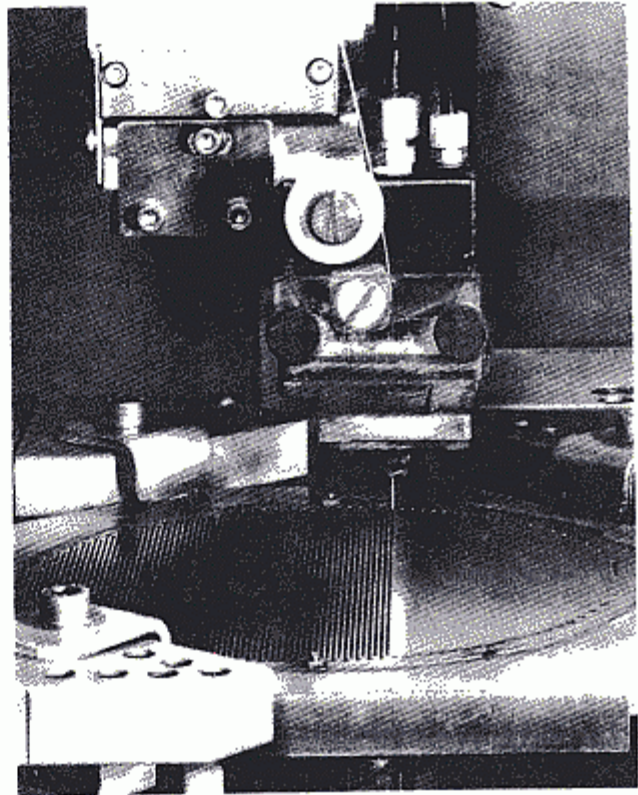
Photograph of 625-micron wide slits being cut in a 144-mm diameter by 10-mm thick tungsten-alloy blank with a traveling-wire Electric Discharge Machine.
